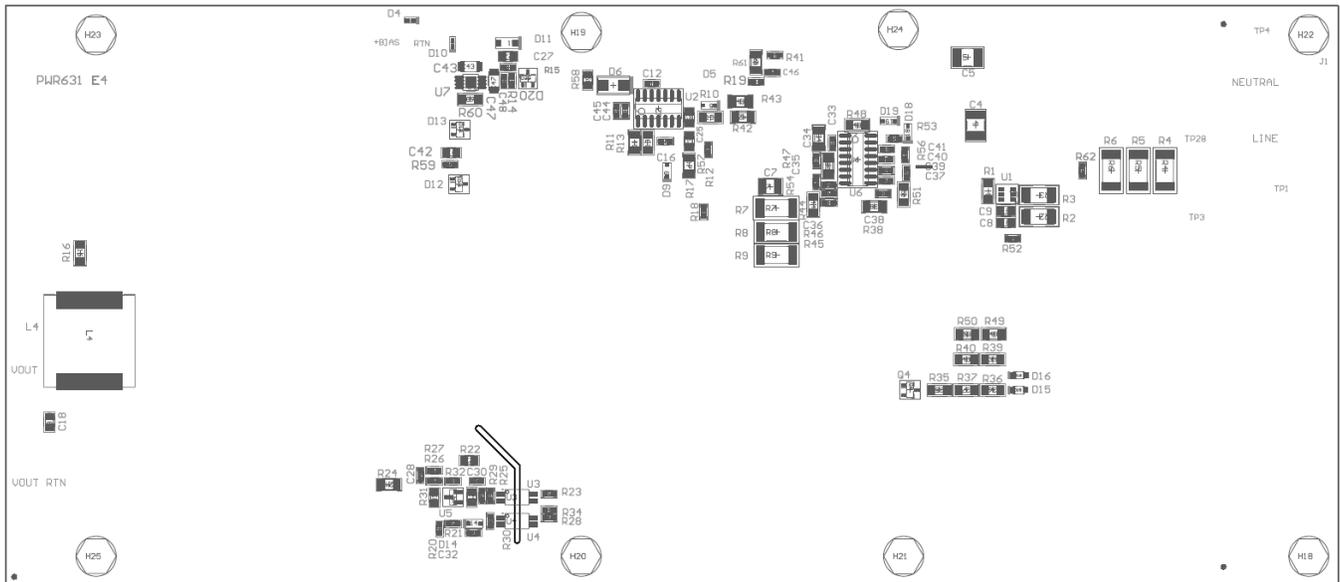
UCC29950EVM-631 Bottom Layer Assembly Drawing (bottom view)
